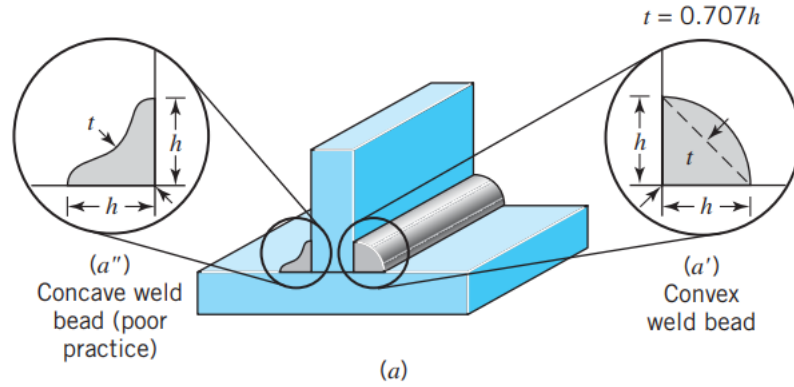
Throat length 't' of a fillet weld ; Figure 11.7 of the 'Fundamentals of Machine Component Design' [19]
